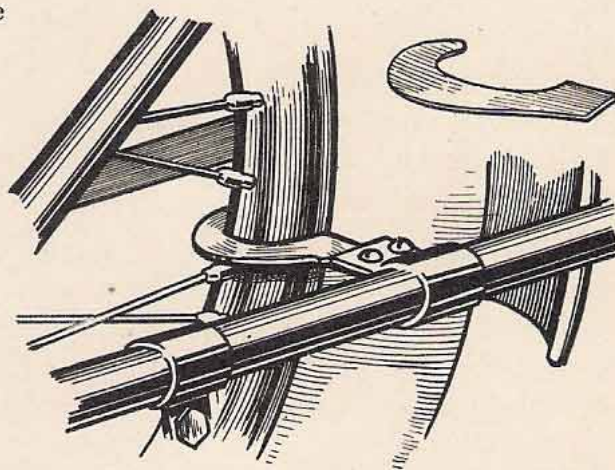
CHECKING REAR-WHEEL SETTING.
